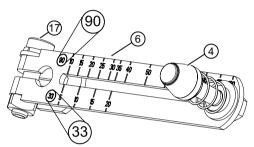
Long lever 6DR4004-8L with mounted carrier pin 4 and cylinder head screw 17
